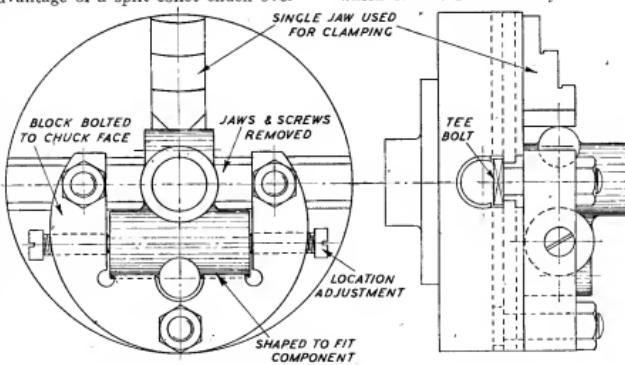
An example of how the four-jaw chuck can be adapted as a chucking jig for awkwardly-shaped components.
